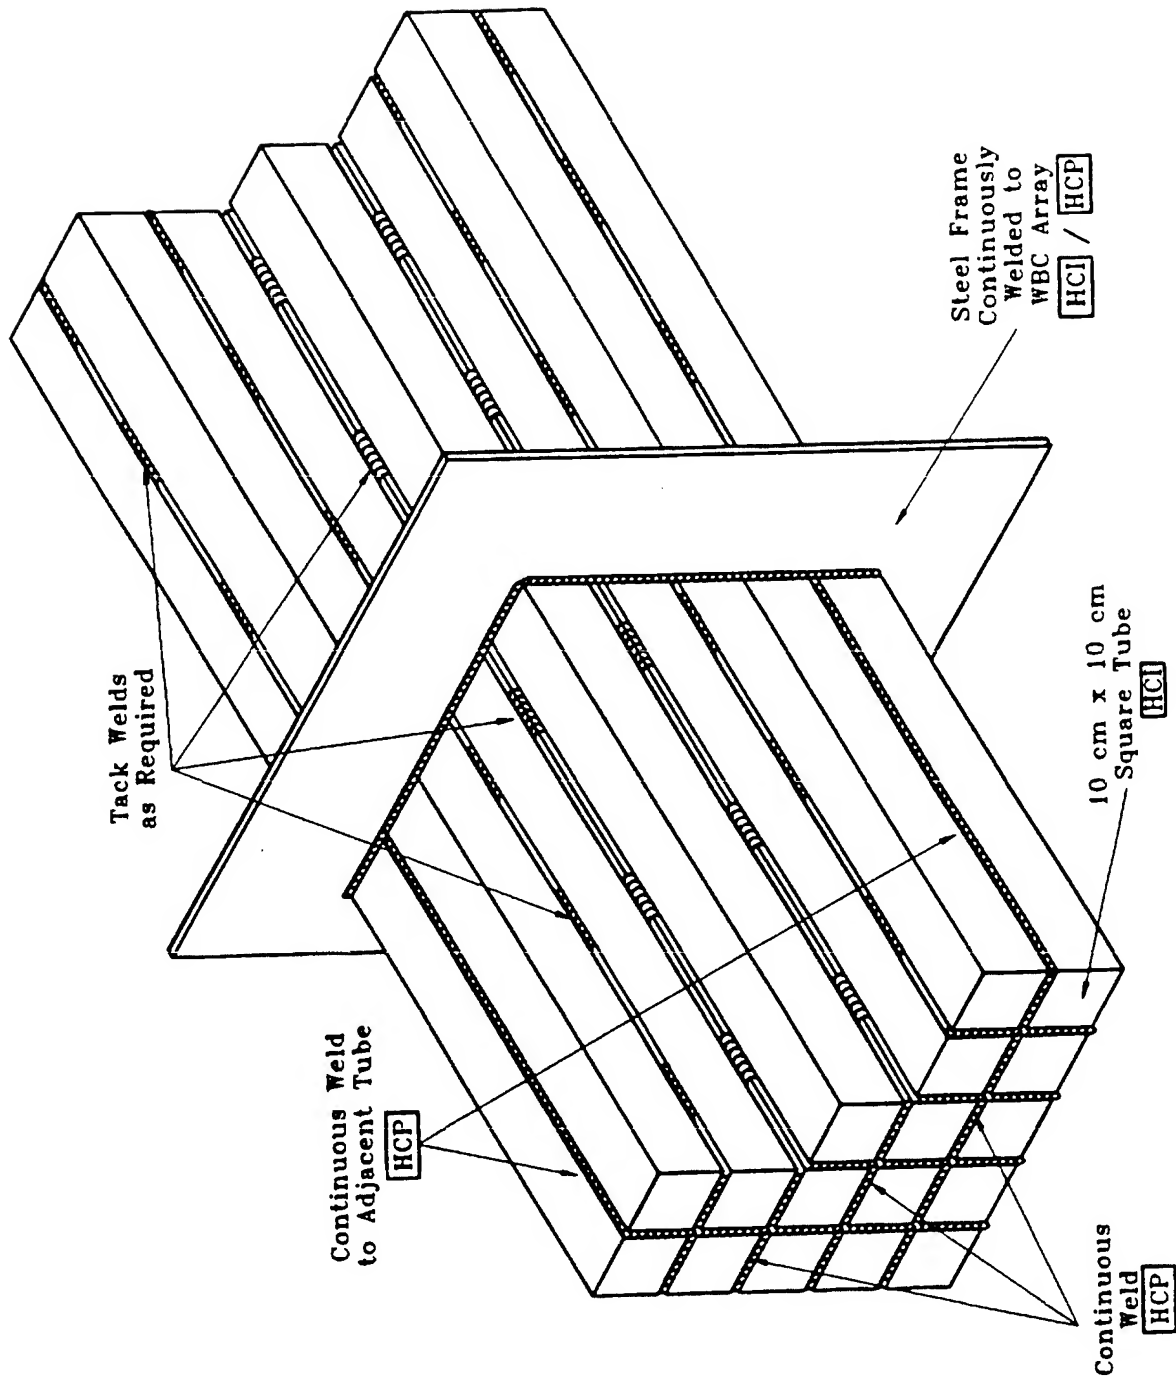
Welded WBC panel assembled from square metal tubes.
